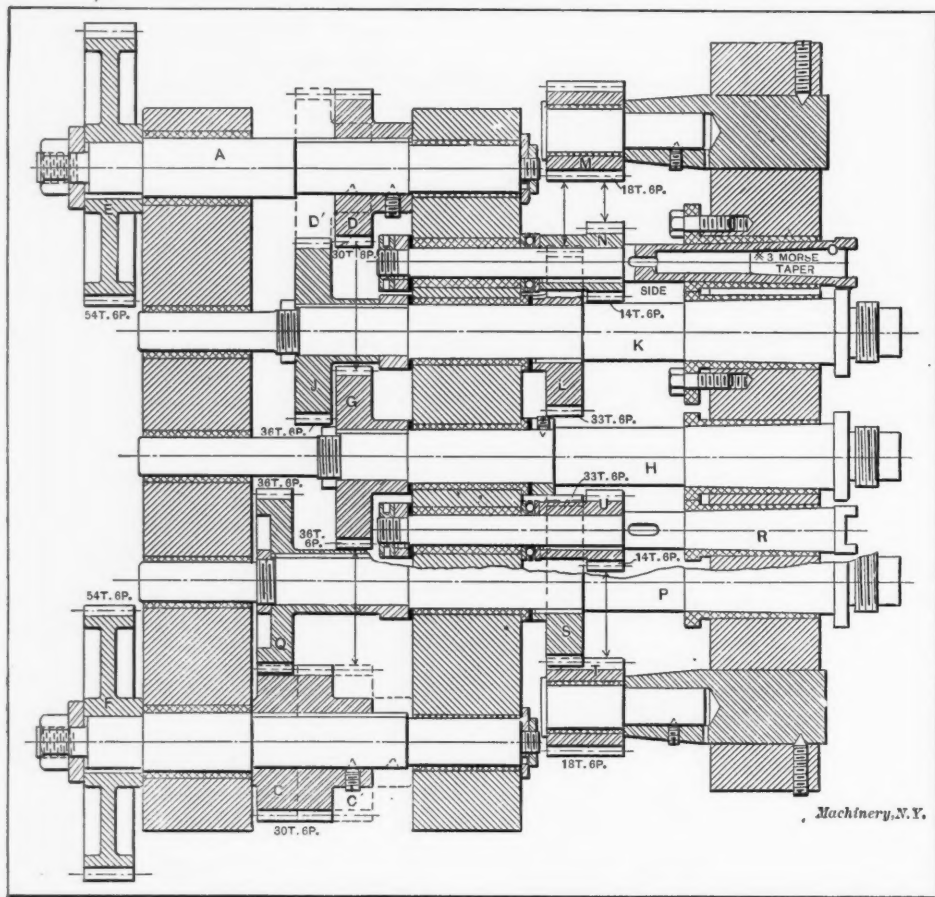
Arrangement of Head Gearing, by means of which Spindle Movements are controlled
